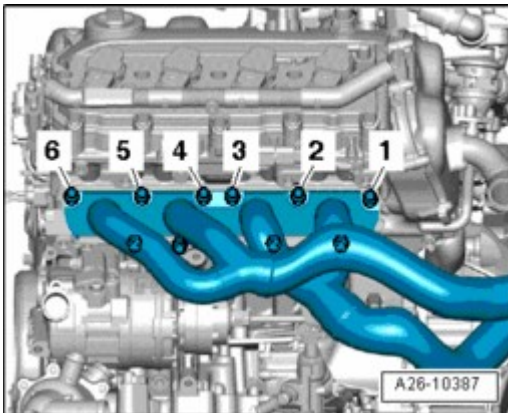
Removing/Installing Nuts And Left Exhaust Manifold
